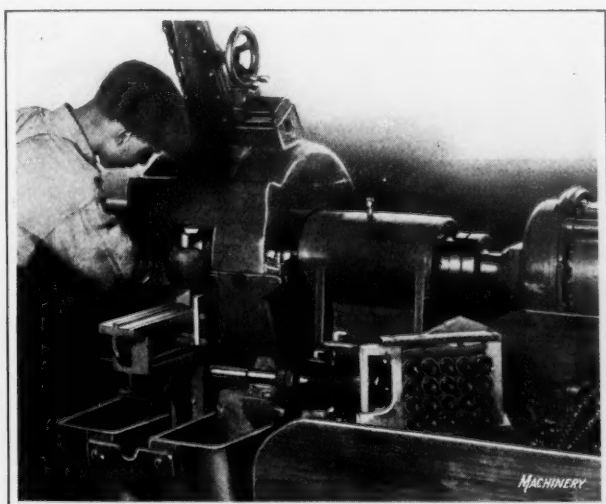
Squaring Ends of Coil Springs on Oilgear Feed Double-spindle Disk Grinder
